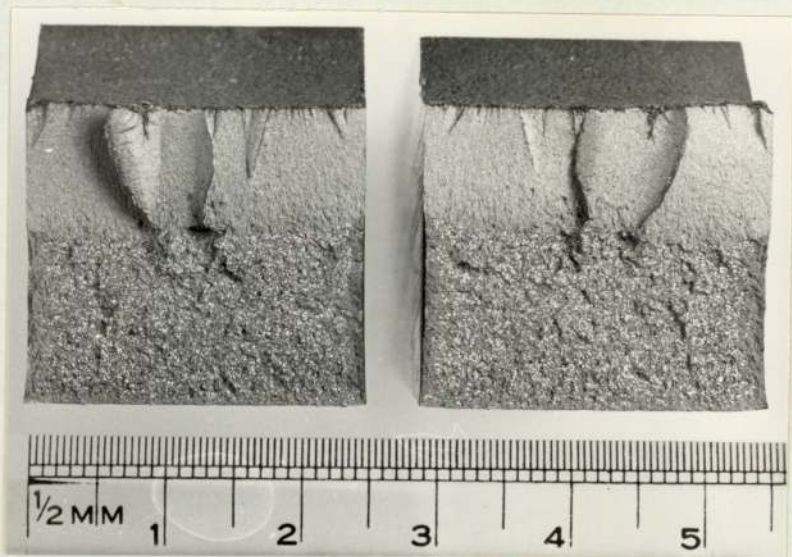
Material L Cast Specimen Fracture Surface.
